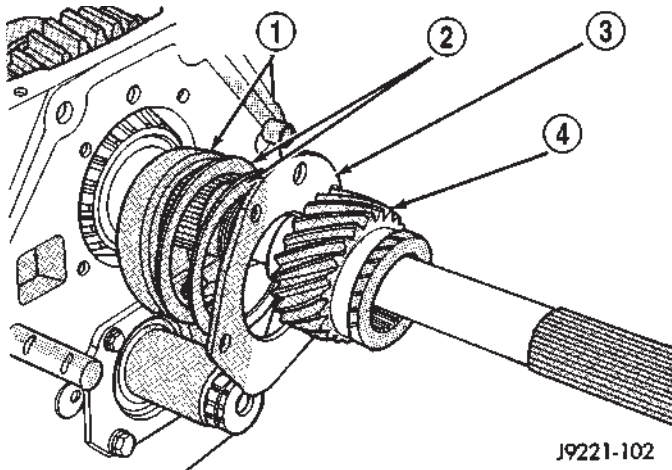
Mainshaft Fifth Gear Bearing Plate, Bearing Shims, And Rear Bearing Cup
